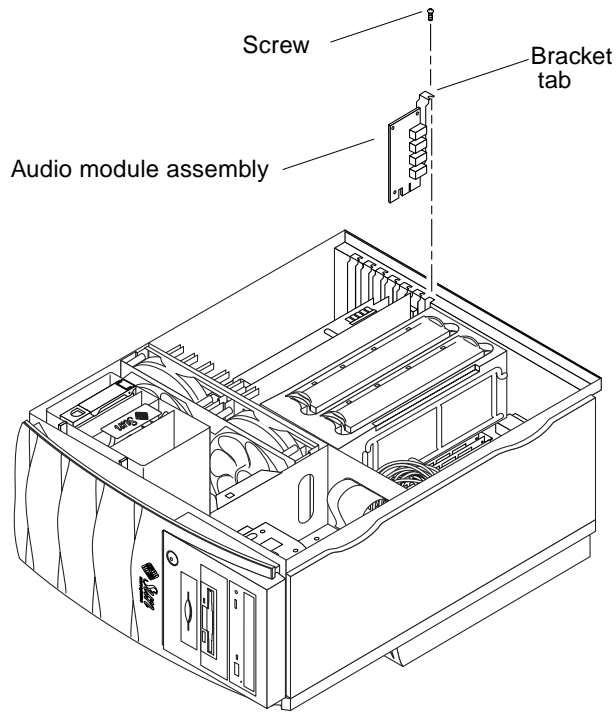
Removing and Replacing the Audio Module Assembly
